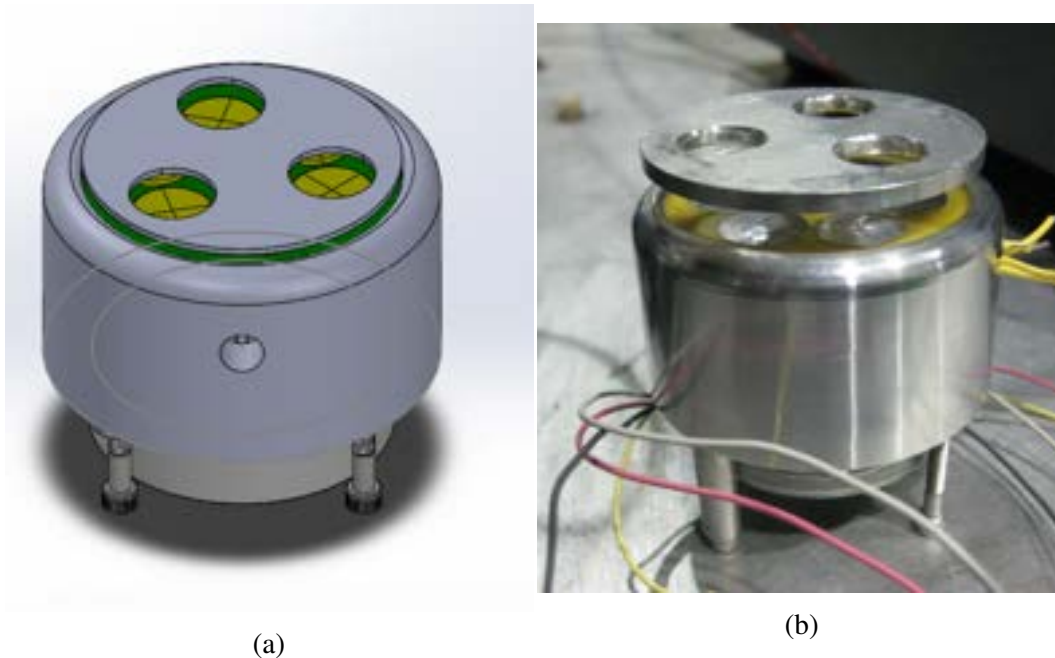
The Demonstrator Prototype Field Mill. Left, the CAD model of the prototype—note the small hole for wires, the motor underneath, and the smooth housing meeting the field mill vane. Right, photograph of the prototype as built—note the thick field mill vane and the large gap between the vane and the housing.
